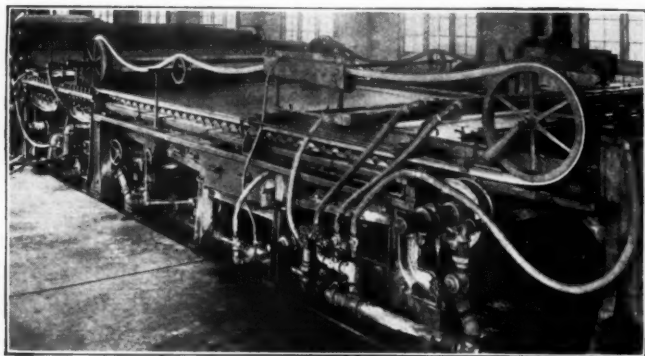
Close-up of Wet End of Fourdrinier Machine (The flat shiny surface on the machine is the "wire" with its coating of wet paper web.) (Note series of 35 table rolls supporting the wire.)
